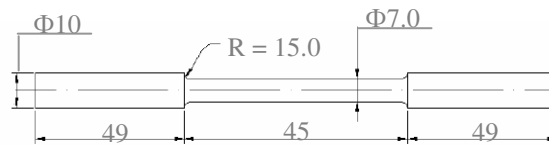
Geometry dimensions of rotating bending fatigue test specimens.
